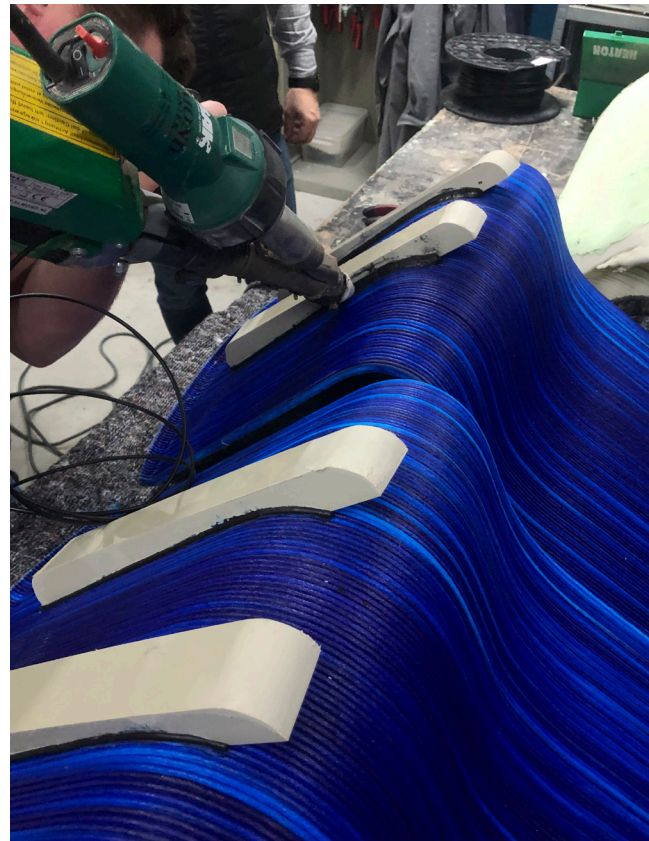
Plastic welding the mounting bars to the underside of the seat pan
